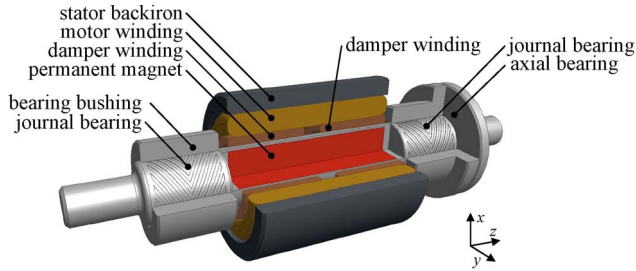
Conceptual drawing of a high-speed permanent-magnet machine with a hybrid bearing concept employing gas bearings in combination with active magnetic dampers.
